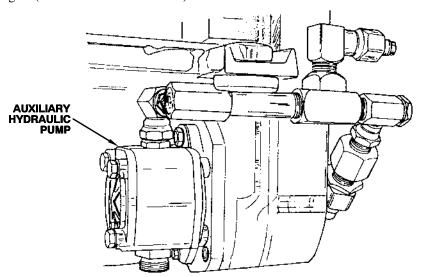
Auxiliary Hydraulic Pump—Installed View.
